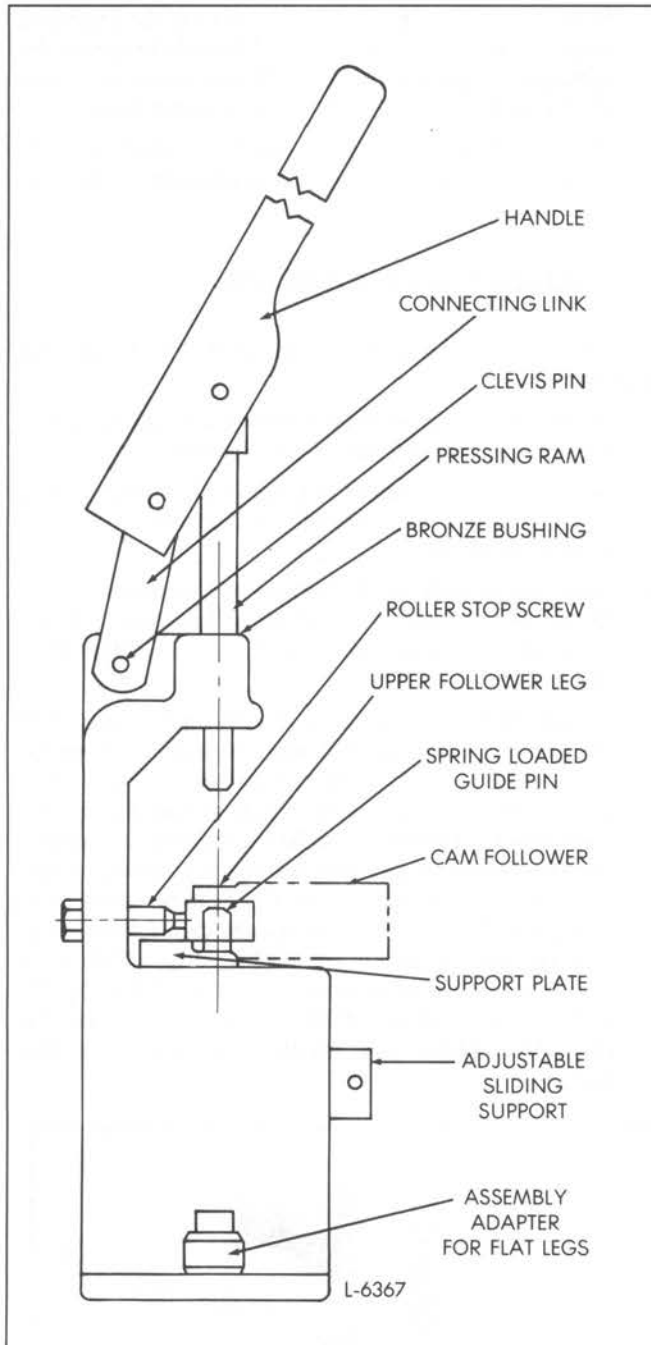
Removing or Installing Cam Follower Roller using Tool J 33421
